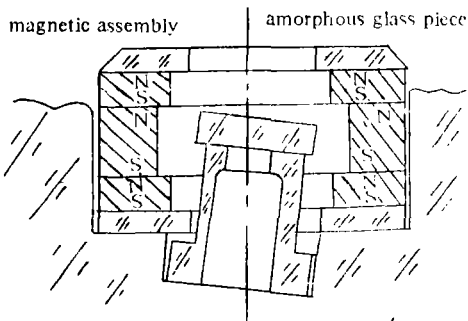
A cross-sectional view of the preferred embodiment of the Farady magnet assembly
